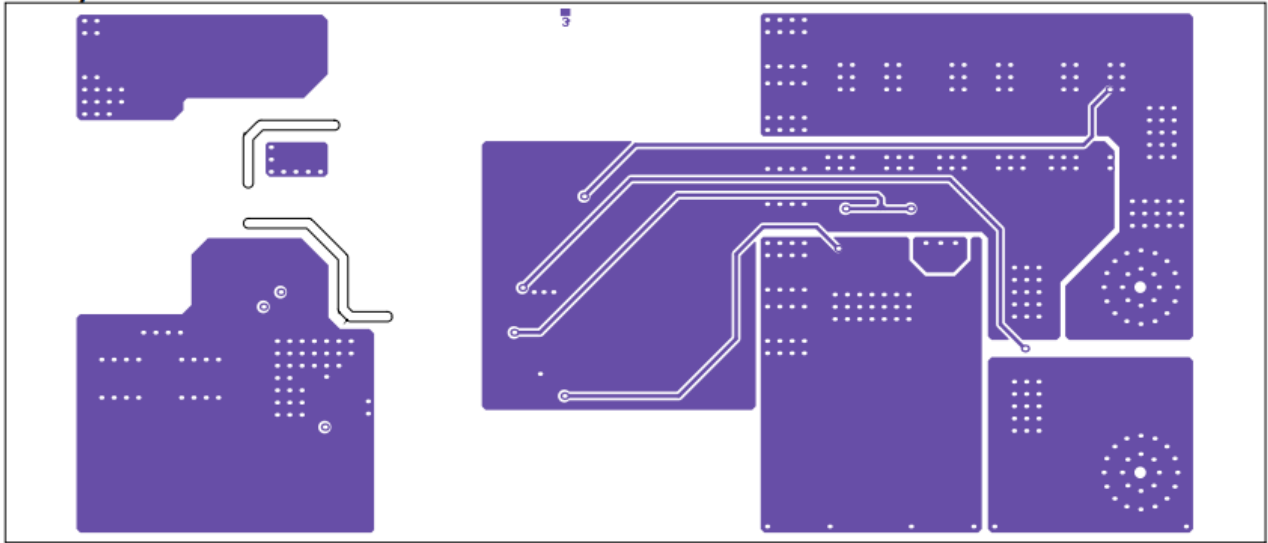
DER-952Q Mid-Layer 3 PCB Layout.
